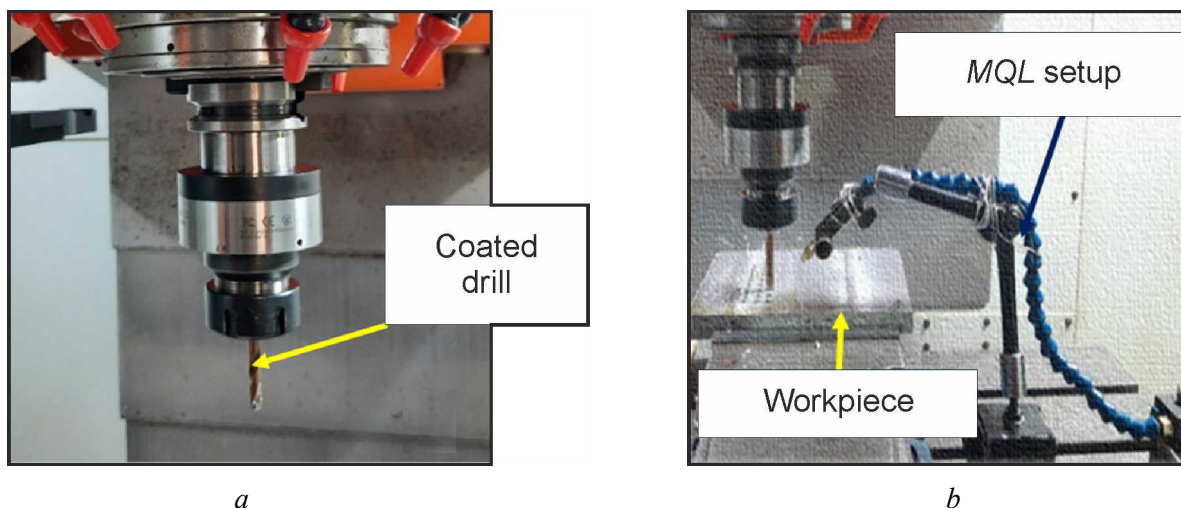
Wireless tool holder (a) and MQL setup (b)
